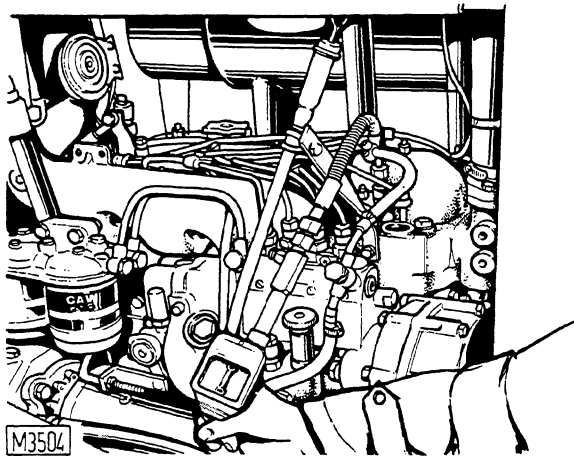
Checking cylinder compression with compression tester 75291310 and dummy injector 75292634.
